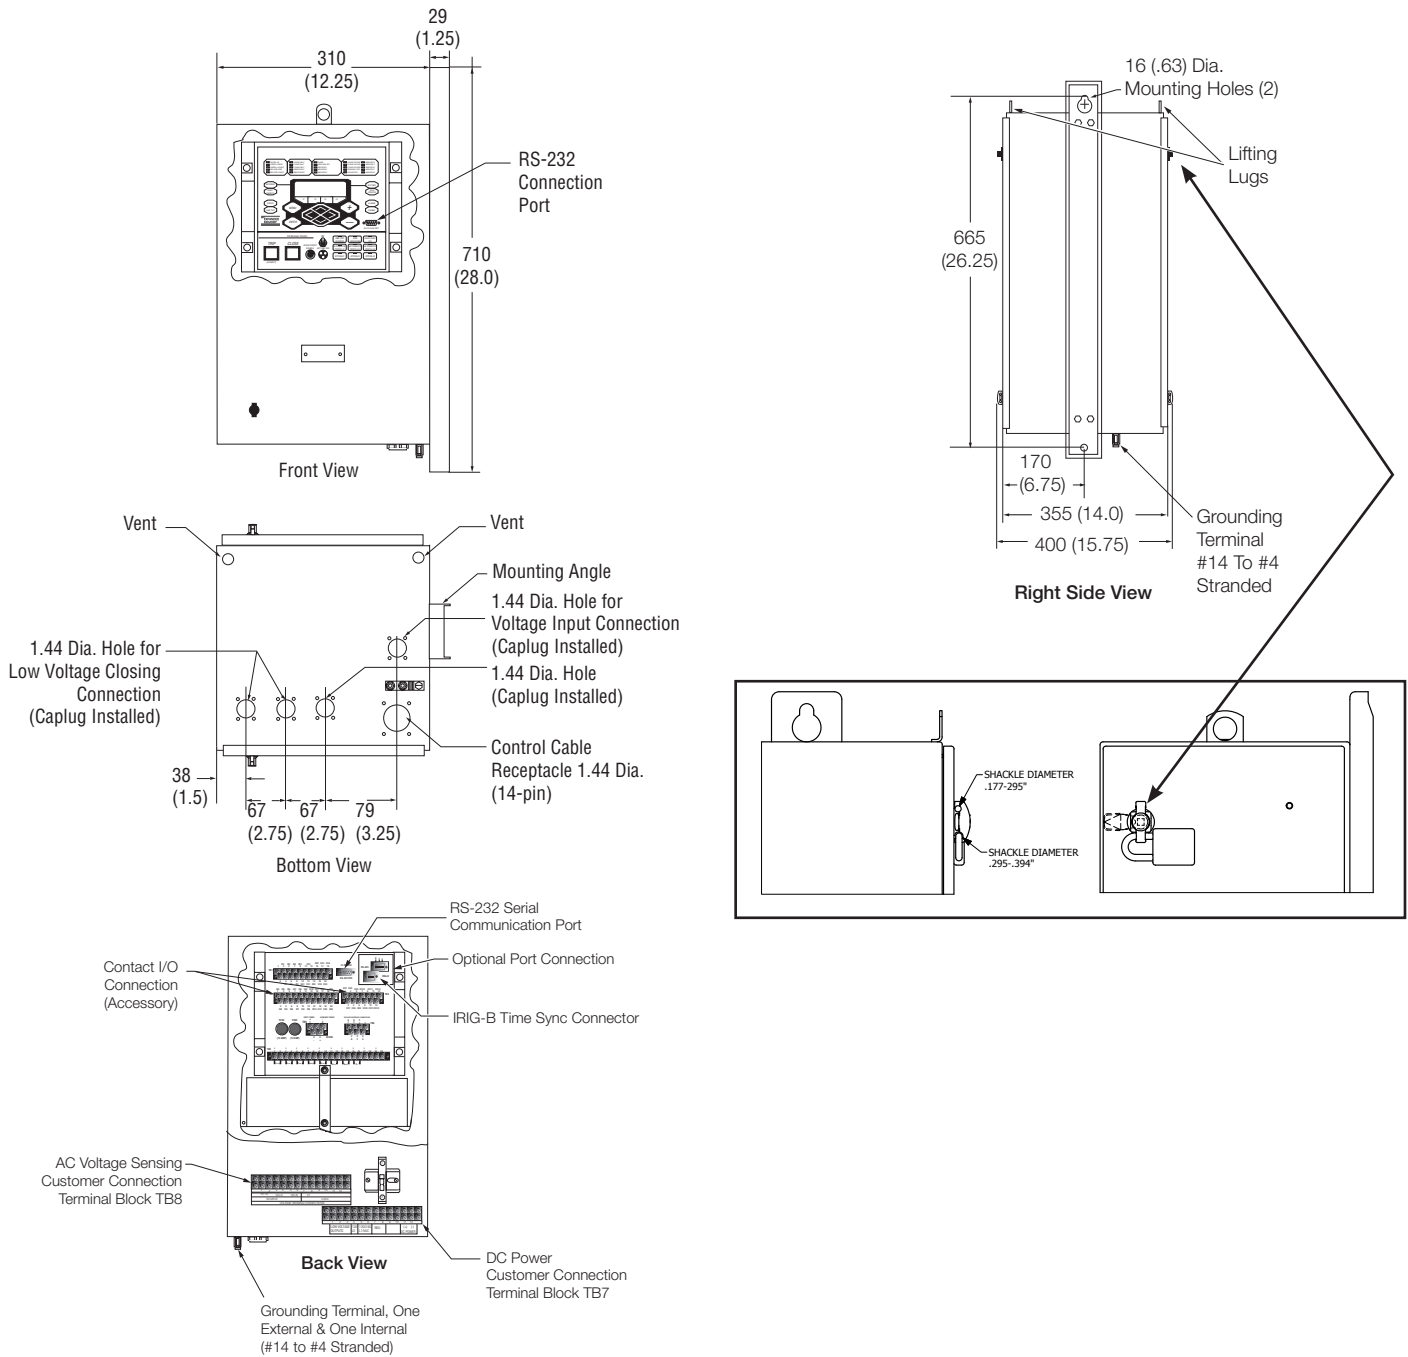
Form 6 yard mount recloser control weight, dimensions, and pad-lock shackle diameters
